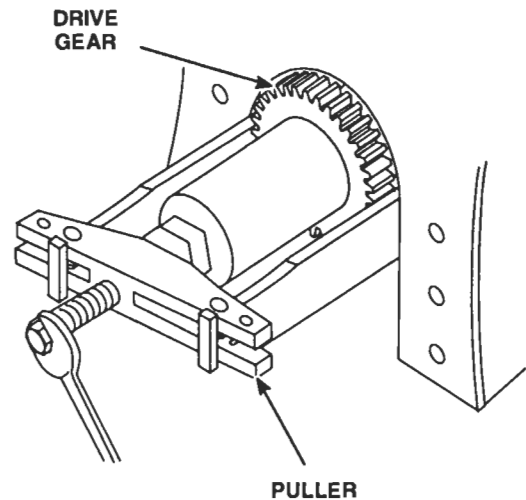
Removing Oil Pump Drive Gear from Crankshaft
